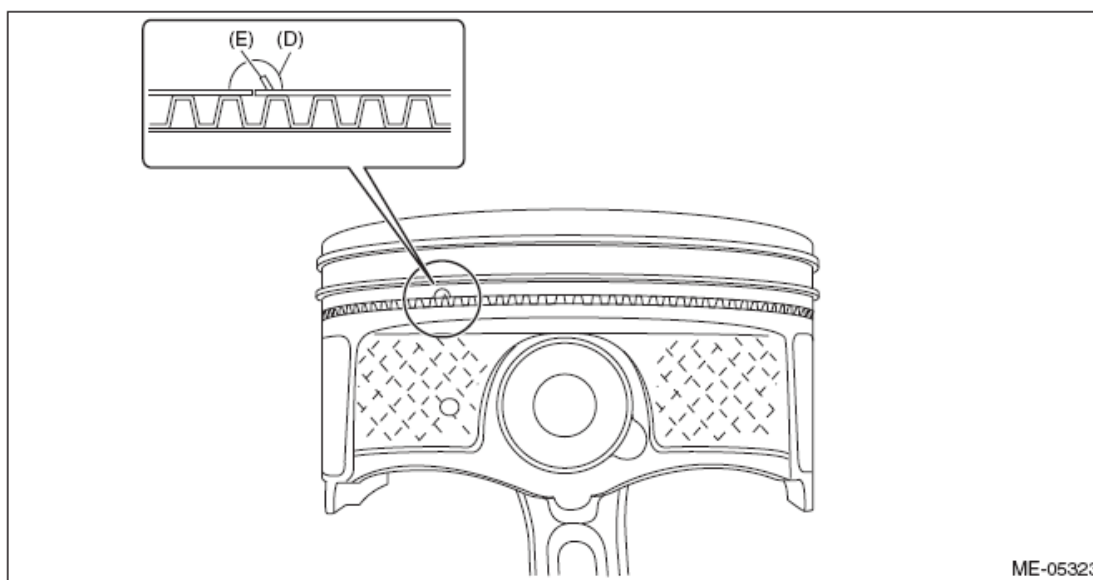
Identifying Piston Upper Rail Spin Stopper And Side Hole
